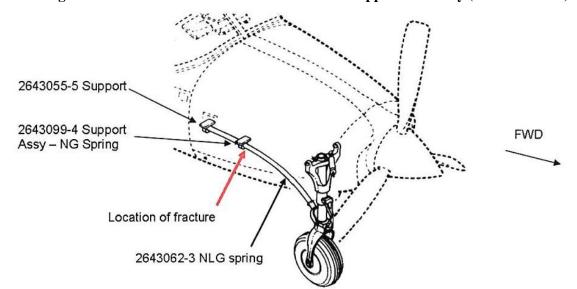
Location of the fracture relative to the Support Assembly (P/N 2643099-4).
